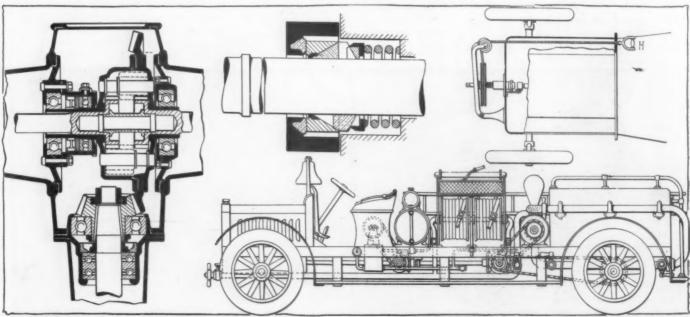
BEVEL GEAR AND DIFFERTIAL MECHANISM PATENTED BY ROYCE
